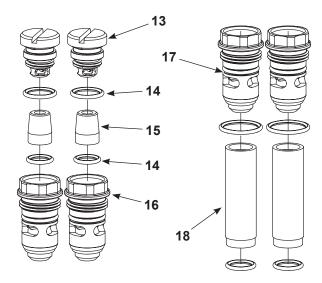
Assemble Fittings to Fluidizing Tubes
